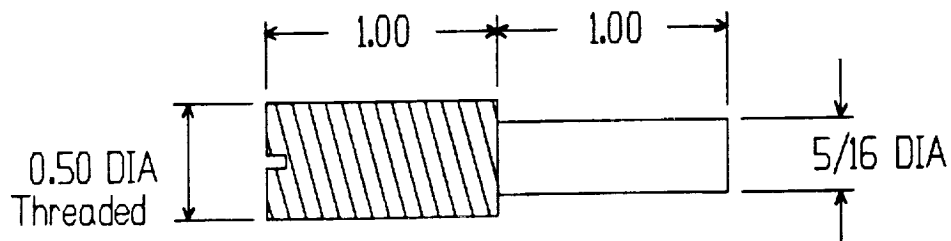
Heated Cavity Apparatus, Spring Mechanism
